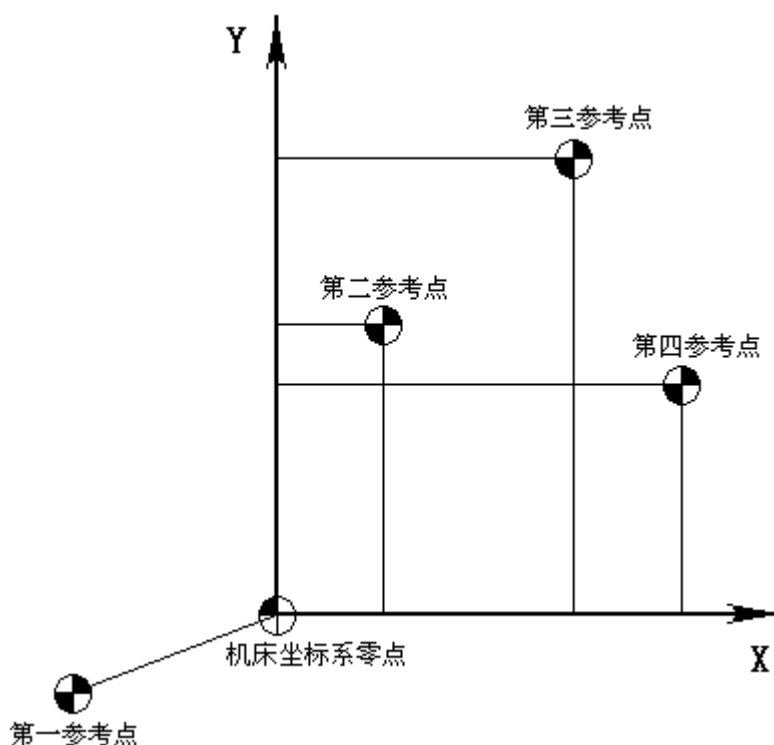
Position Relationship between Machine Tool Coordinate System and Reference Points
